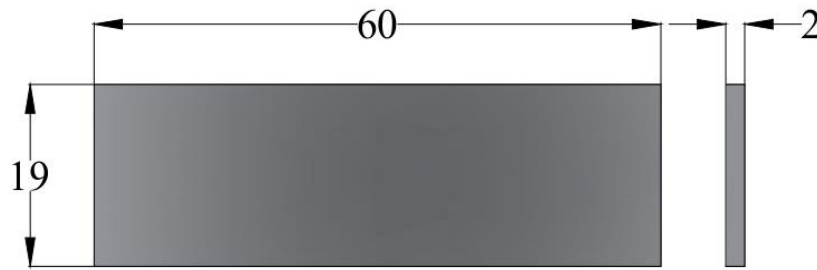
The dimensions of the 6063-T5 aluminium alloy used for testing.
